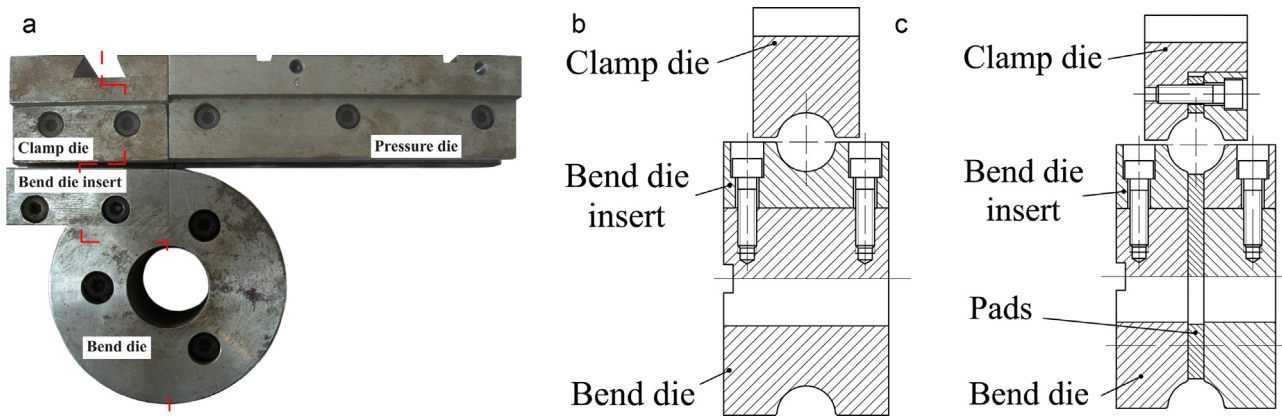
Structure of the rotary draw bending die assemblage. (a) A set of rotary draw bending die (b) Section of traditional die (c) Section of MDB-Die.
